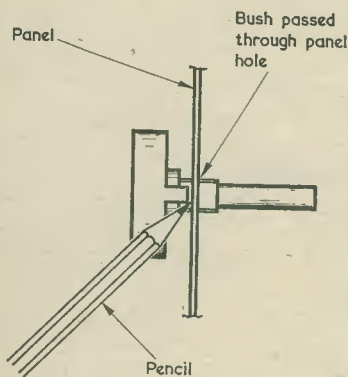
To find the position required for a potentiometer locating lug hole, first drill the main bush-mounting hole, pass the bush through this and mark off the position required for the locating lug hole with a pencil
